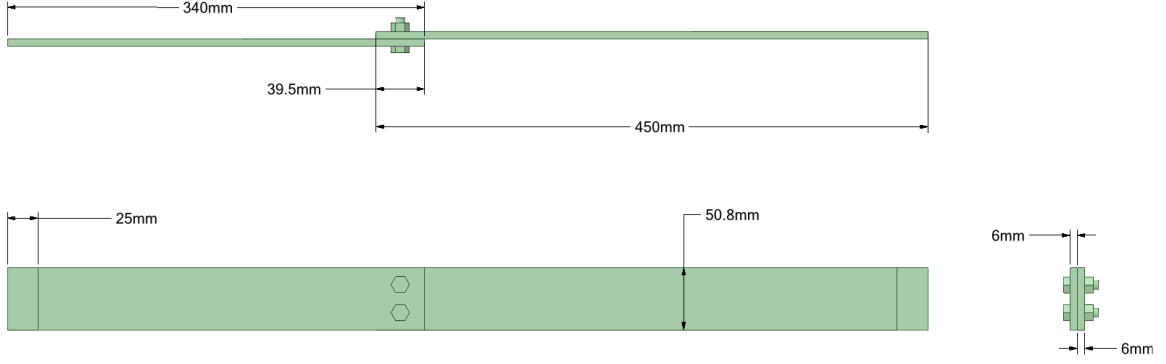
Geometric Setup for Bolted joint with 39.5mm
